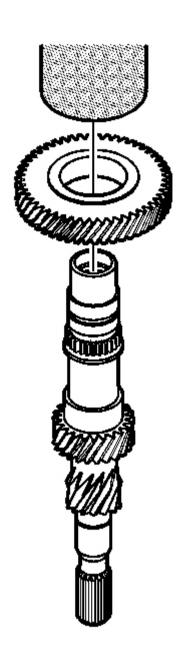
Installing 5th Gear Using J 24433 Courtesy of GENERAL MOTORS CORP.
